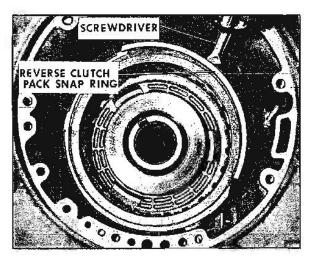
Removing Reverse Clutch Pack Snap Ring
